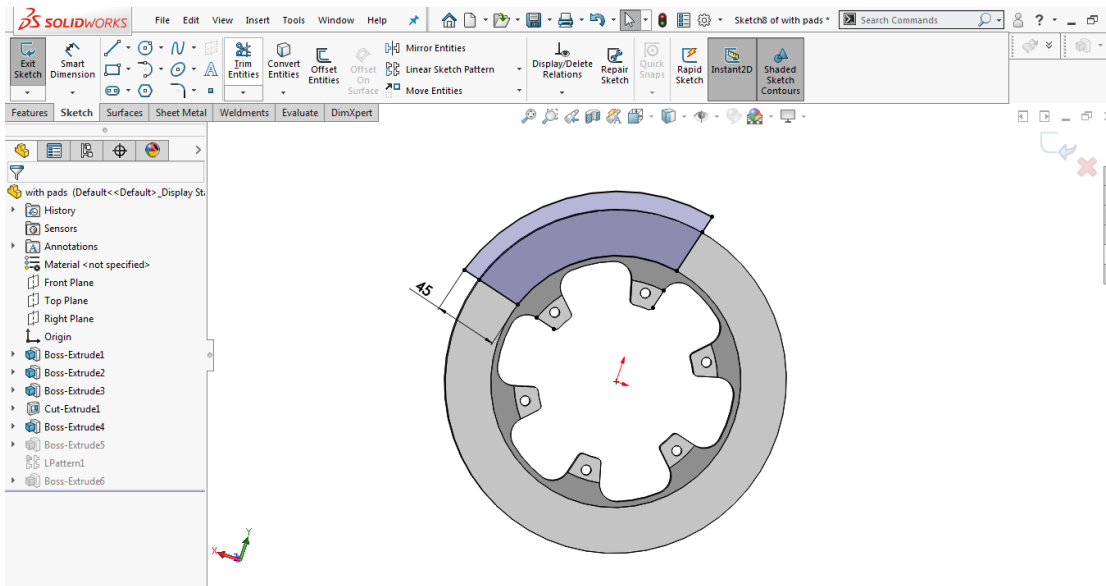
Sketch Feature Is Used For Brake Pads
